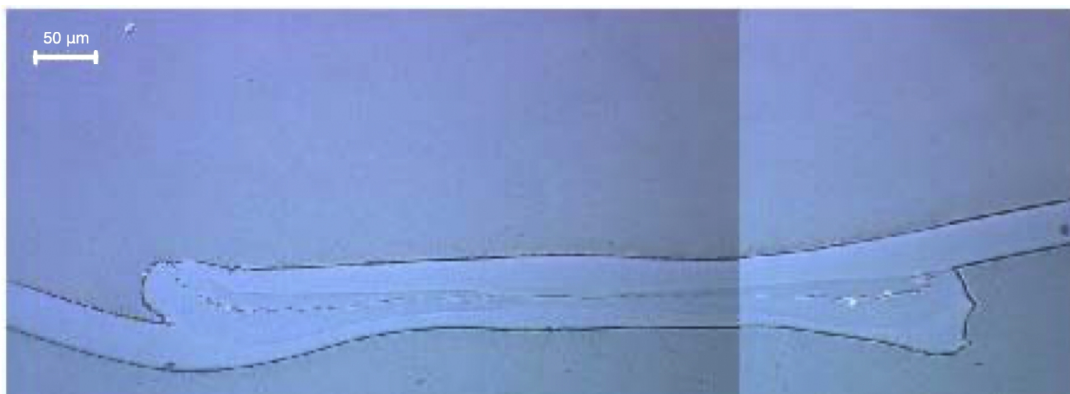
Cross-section of a welded seam where the two sides of the strip are fused.
